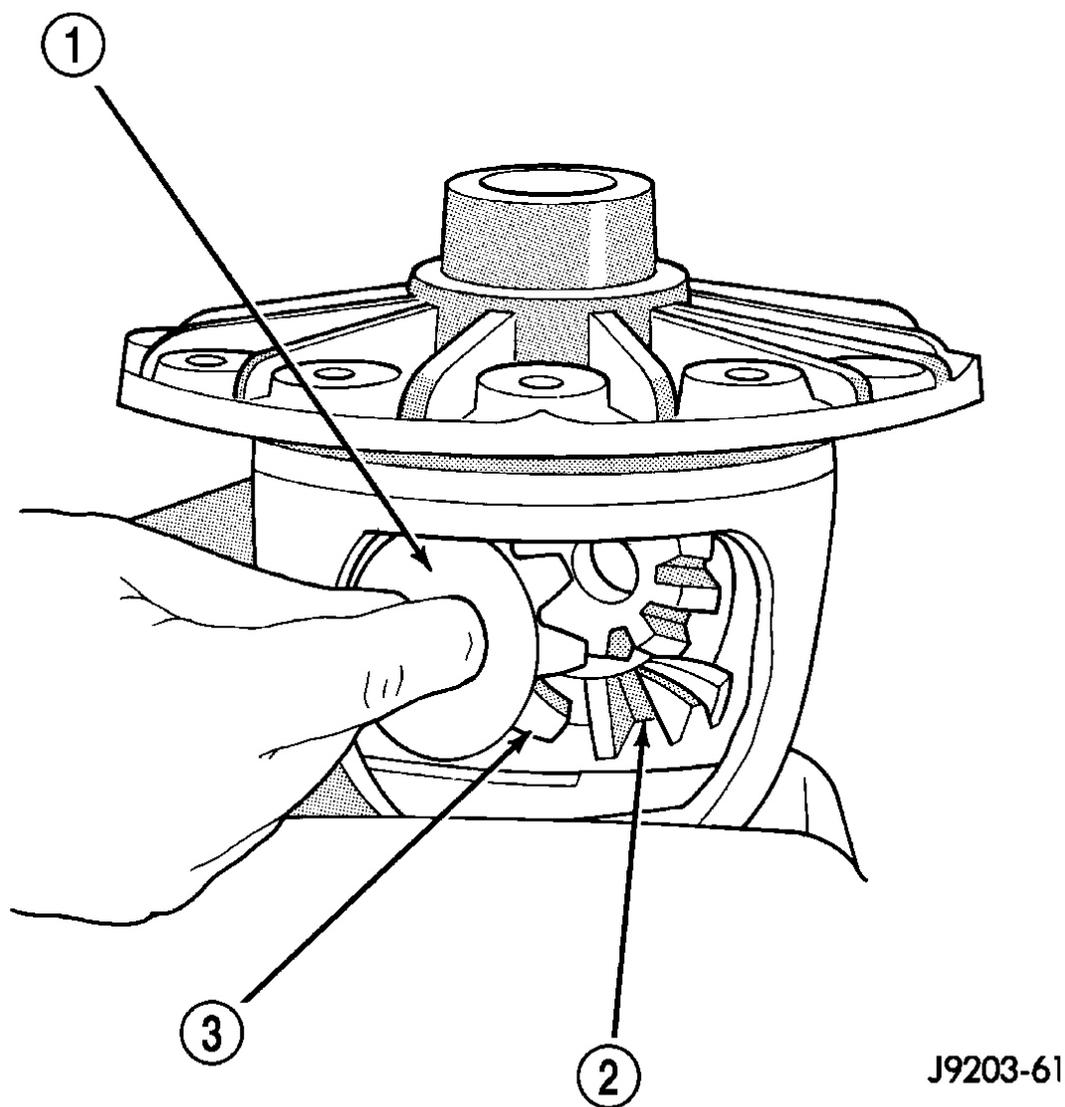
Identifying Differential Side Gears, Pinion Gears & Thrust Washers
